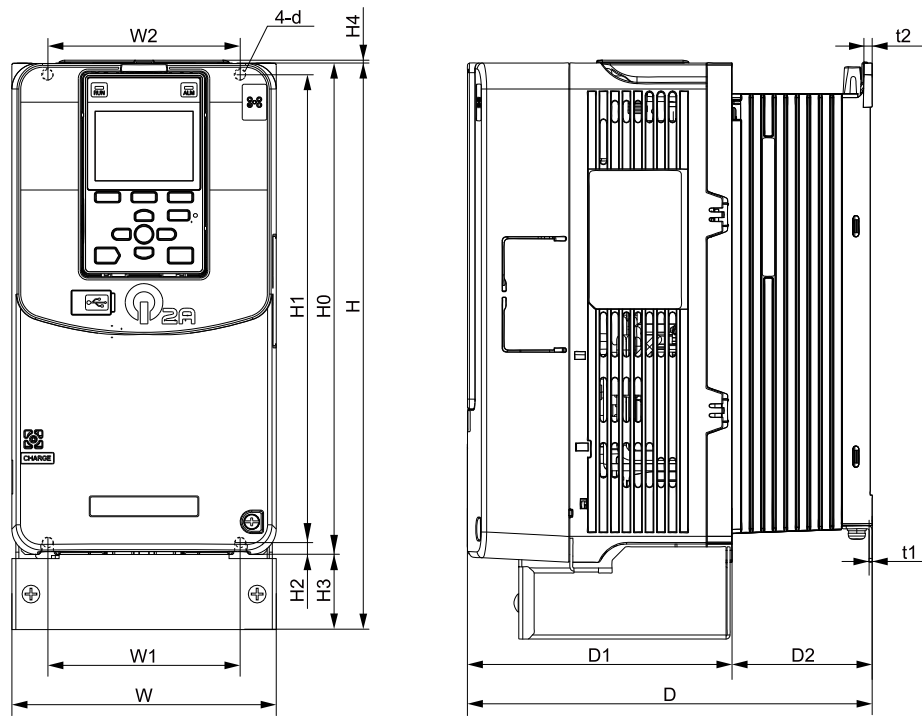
Exterior and Mounting Dimensions Diagram 1
